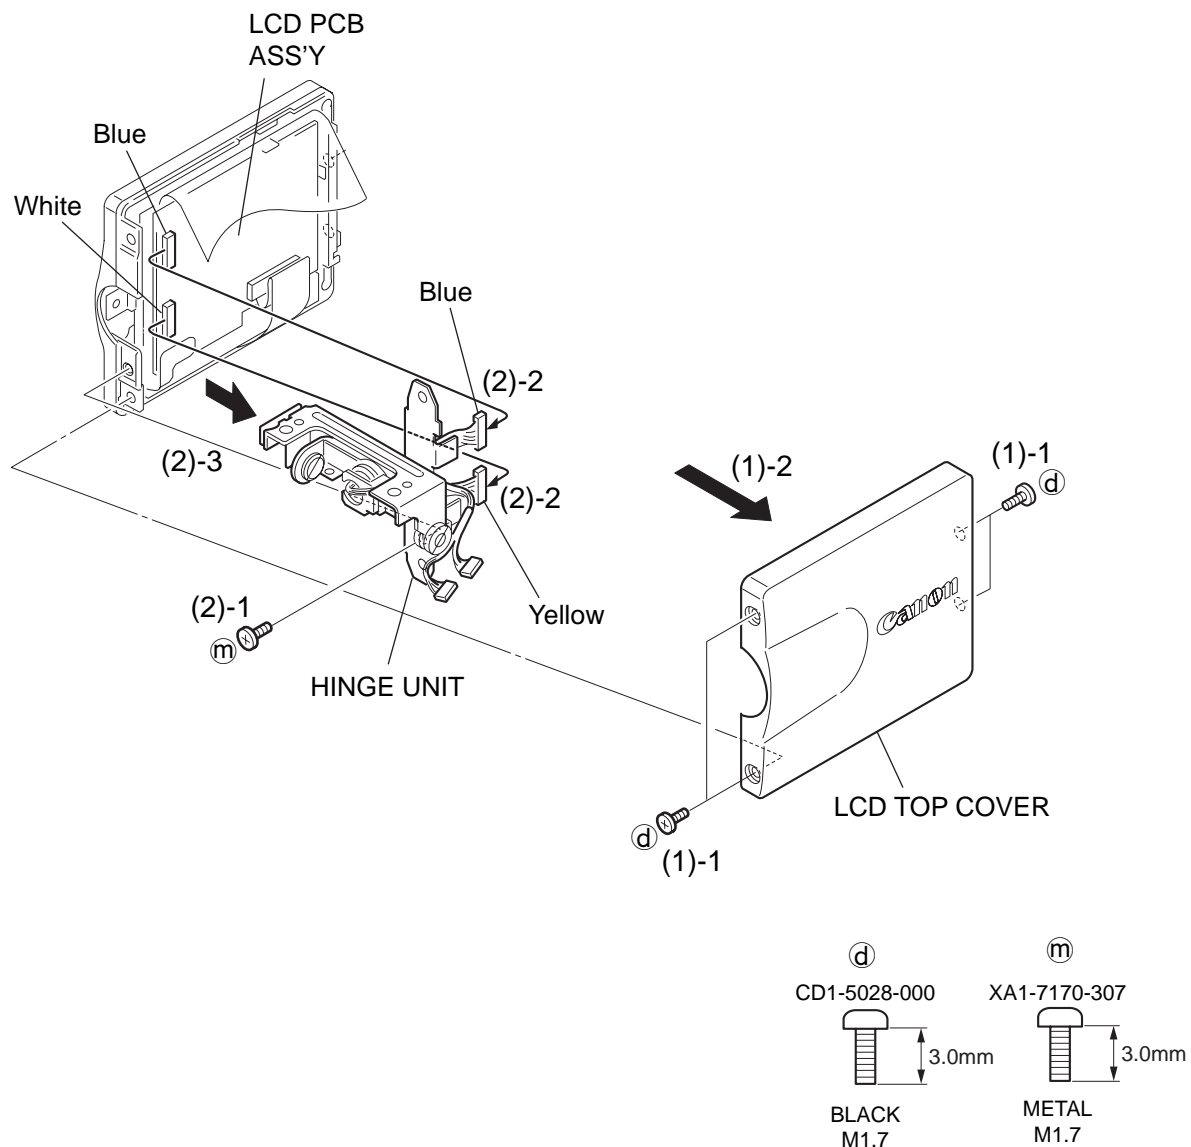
LCD TOP COVER, HINGE UNIT
